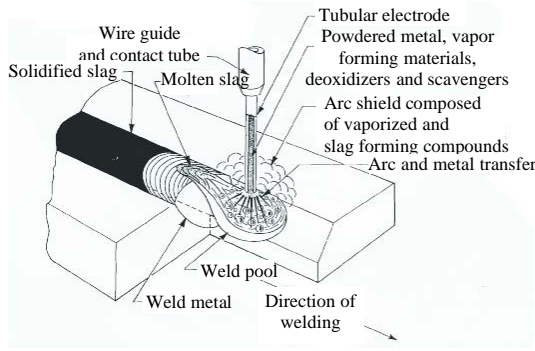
Flux Cored Arc welding process (FCAW)
